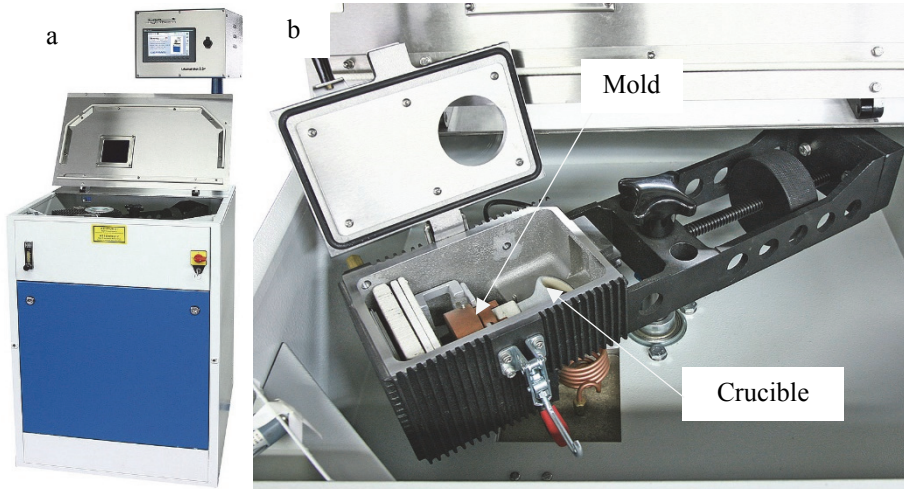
Ingot cast: (a) casting unit used for splat quenching experiments; (b) casting arm [79].
